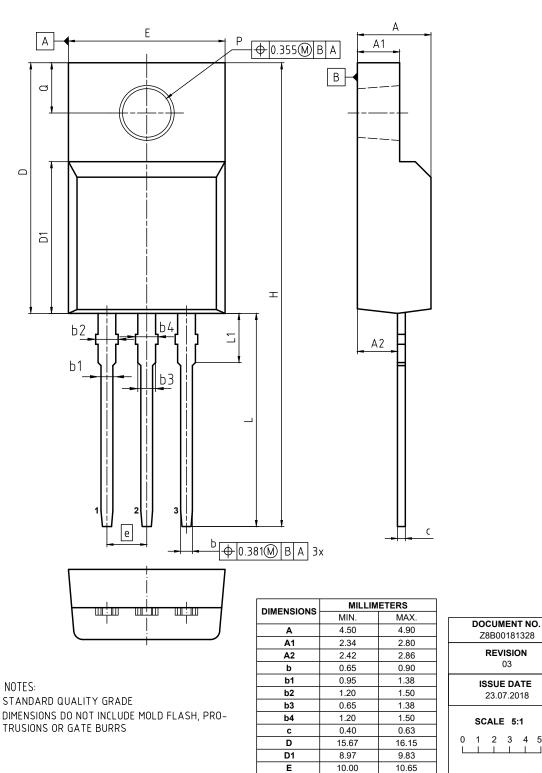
Outline PG-TO 220 FullPAK, dimensions in mm/inches
